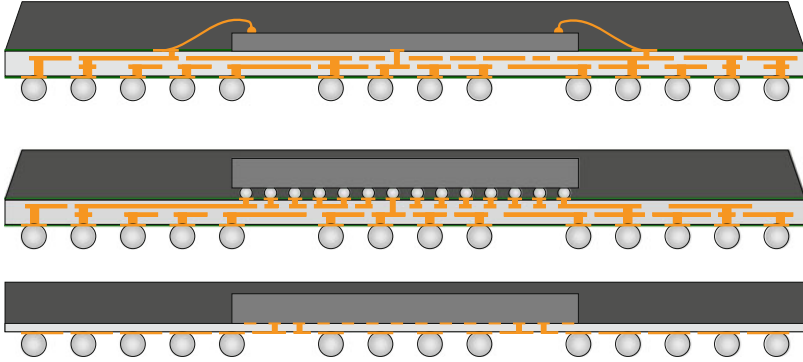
Cross sections of wire bond BGA package, flip chip BGA package, and fan-out WLCSP. Fan-out WLCSP can achieve thin package profile easier than both BGA package due to elimination of substrate, bonding wires, and flip chip solder joints
